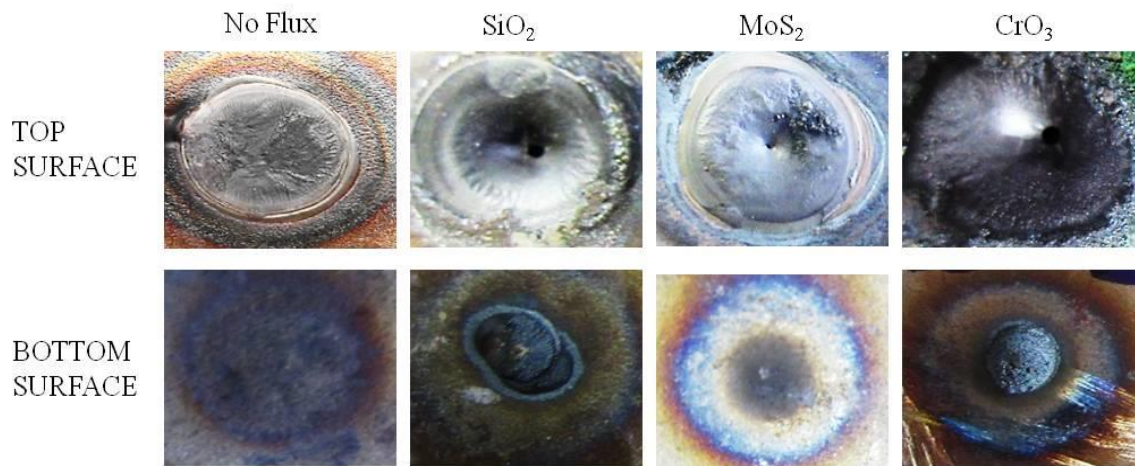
27: As-welded weld coupons showing the top and bottom surfaces of the welds
